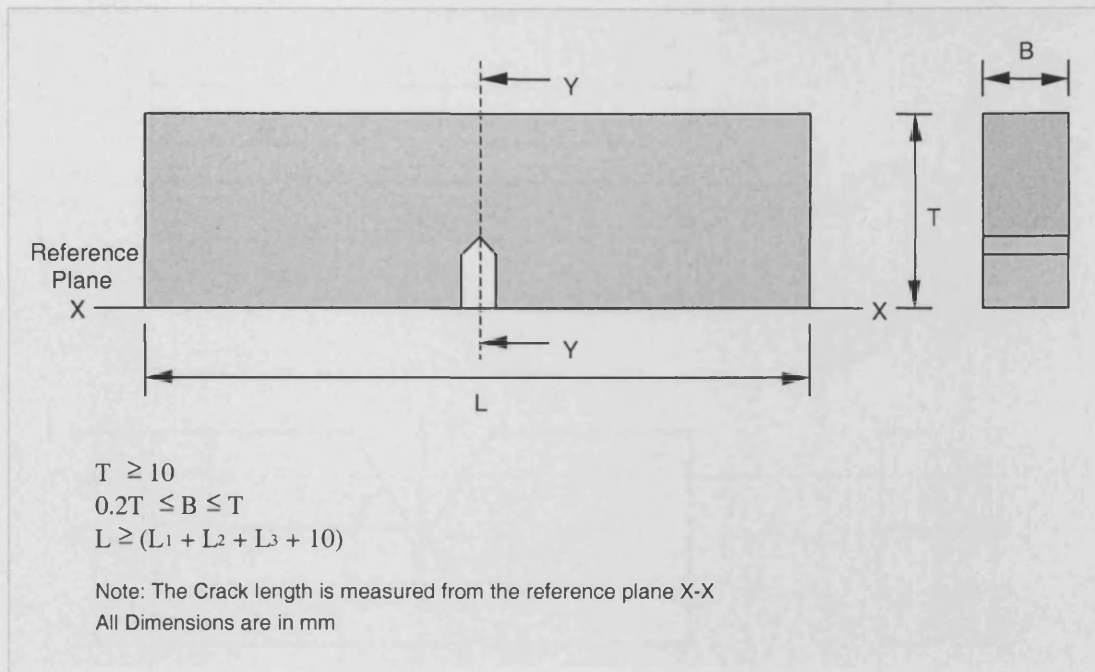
SNEB4 Specimen Design Tolerances
